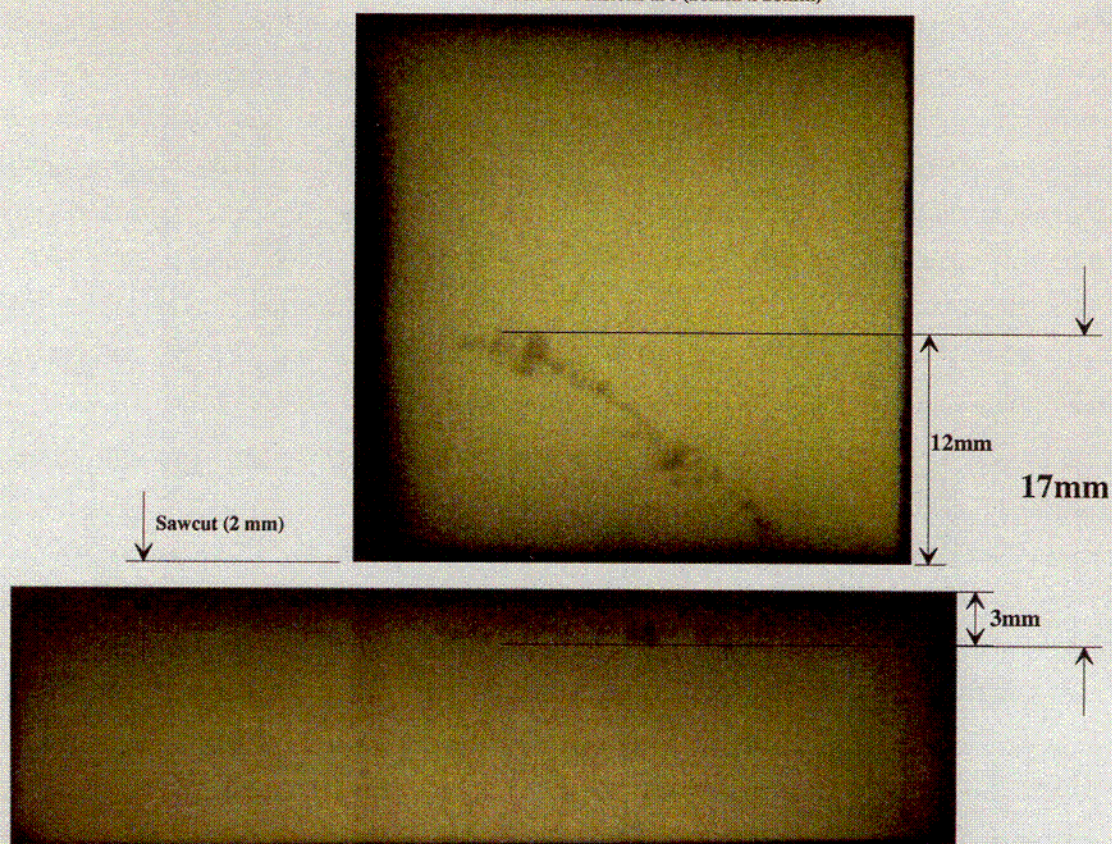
Weld-Normal UT C-scan Image of Weld Fusion Surface Showing Profile of Weld Repair's Low Acoustic Energy Signature
